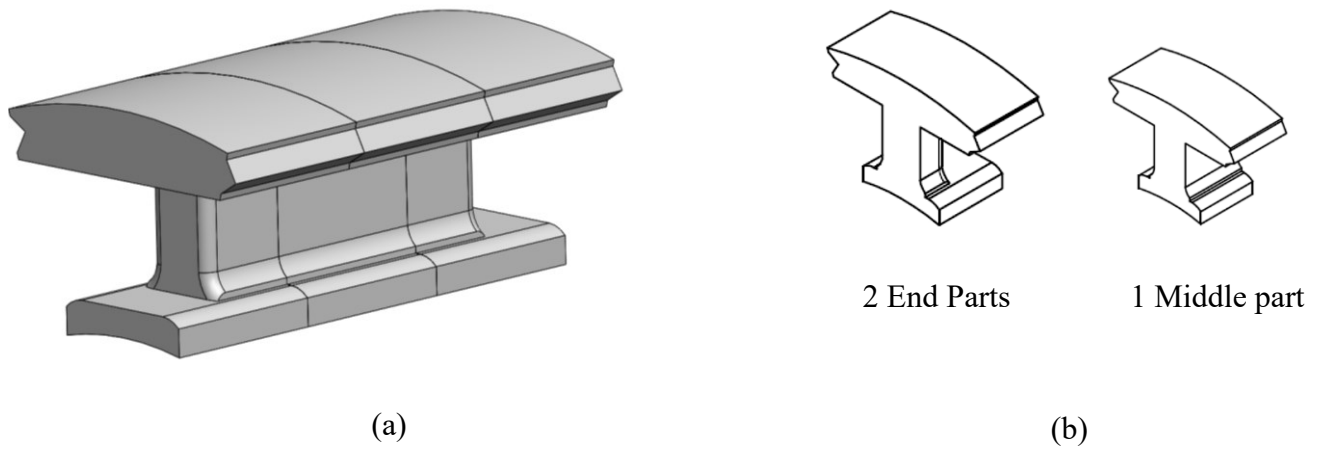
Tooth-3 with 3 axial segments sketched using CAD software.
